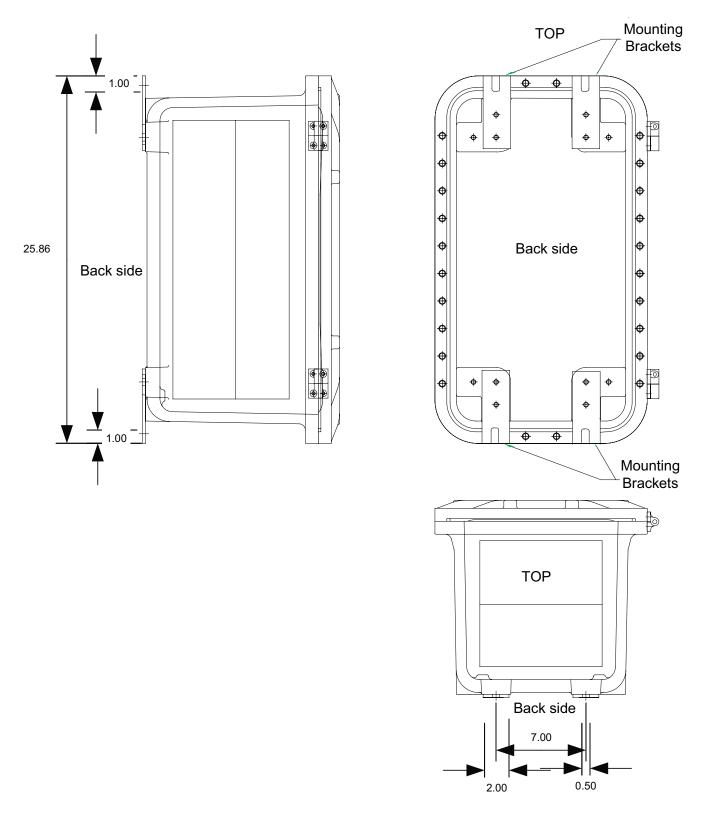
EQ3900RPSE Explosion-proof Enclosure - Mounting Dimensions
